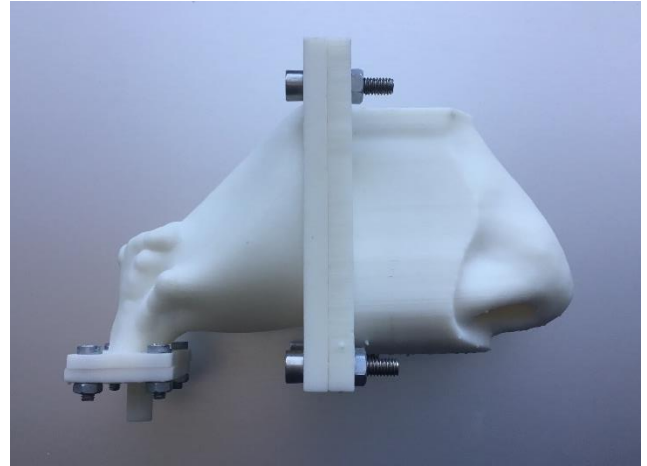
3D PRINTED RESULT AFTER SUPPORTS REMOVAL AND ASSEMBLY
